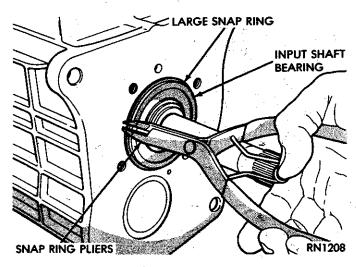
Removing/Installing Front Bearing Locating Snap Ring
